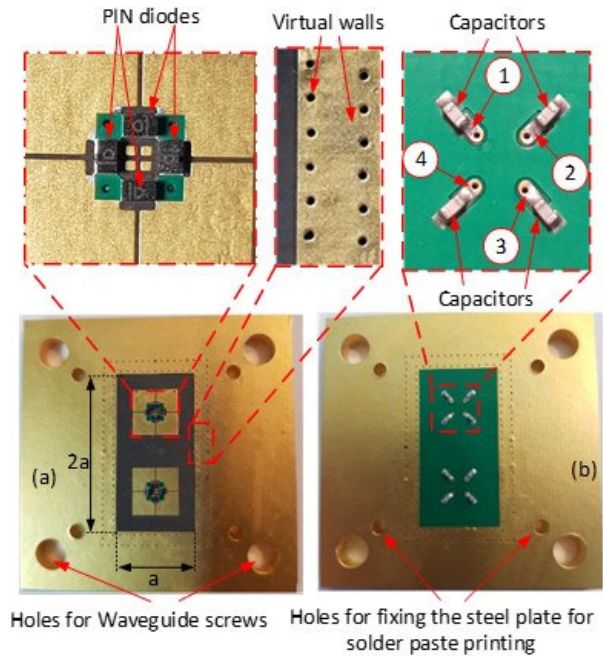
Fabricated double unit cell: (a) top layer, and (b) bottom layer.
